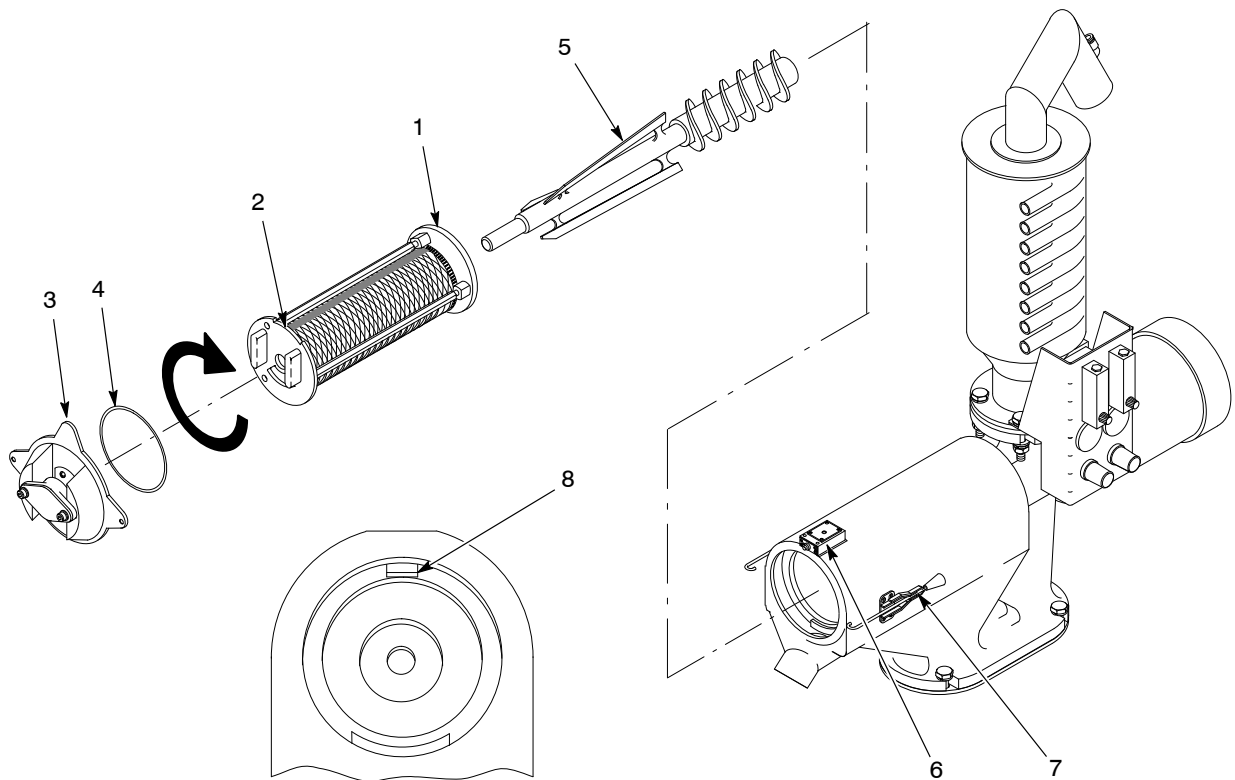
Assembling the Rotary Sieve with the New NRPS-200 Rotor and End Door
